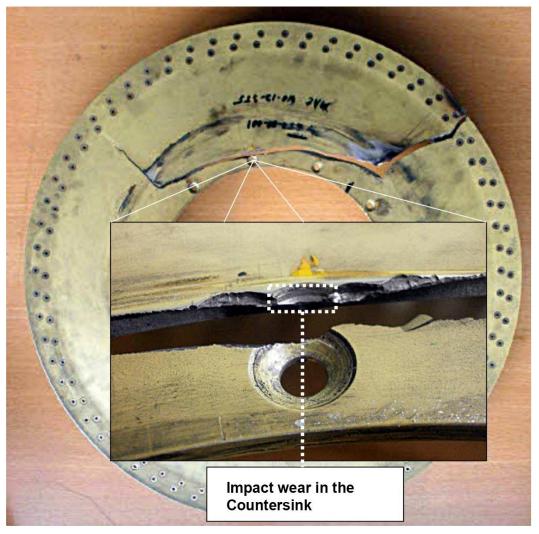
Front view of the damaged cooling fan of SE-HJR.
